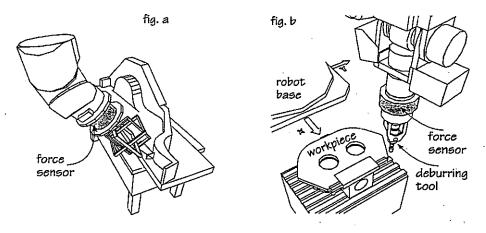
Typical examples of advanced robotic applications. Fig. a is tracking of a 3-D seam as in a welding operation, and Fig. b is deburring of a casting.
